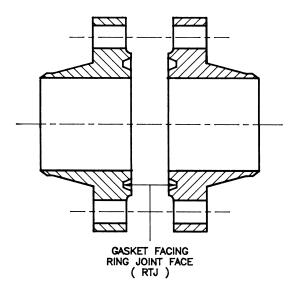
Weld neck flange with a ring-type joint face.
